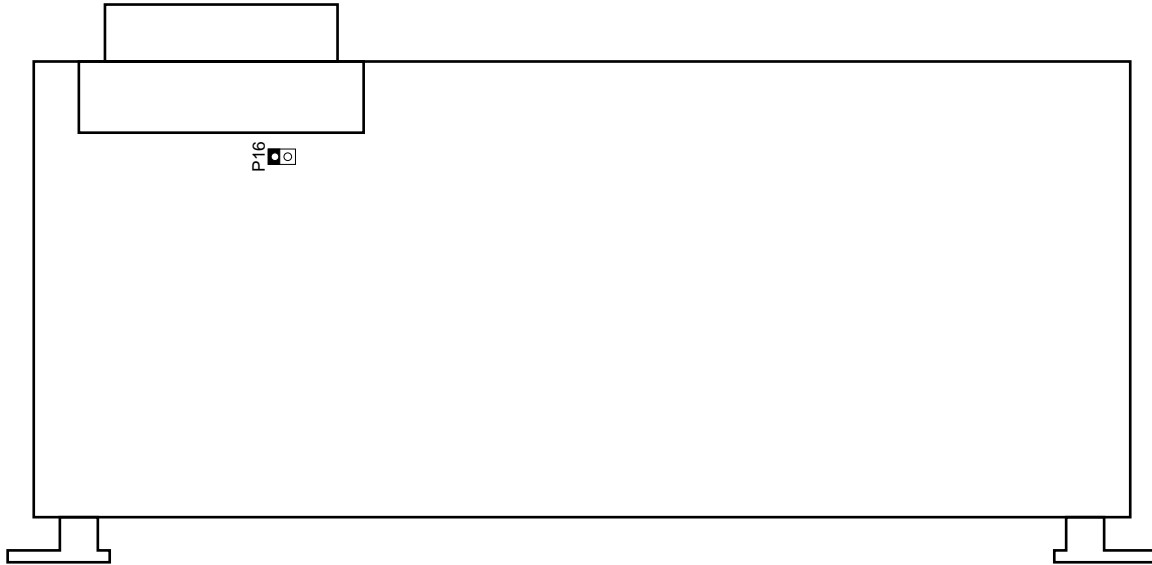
Jumper Position on CMC6B I/O Board
